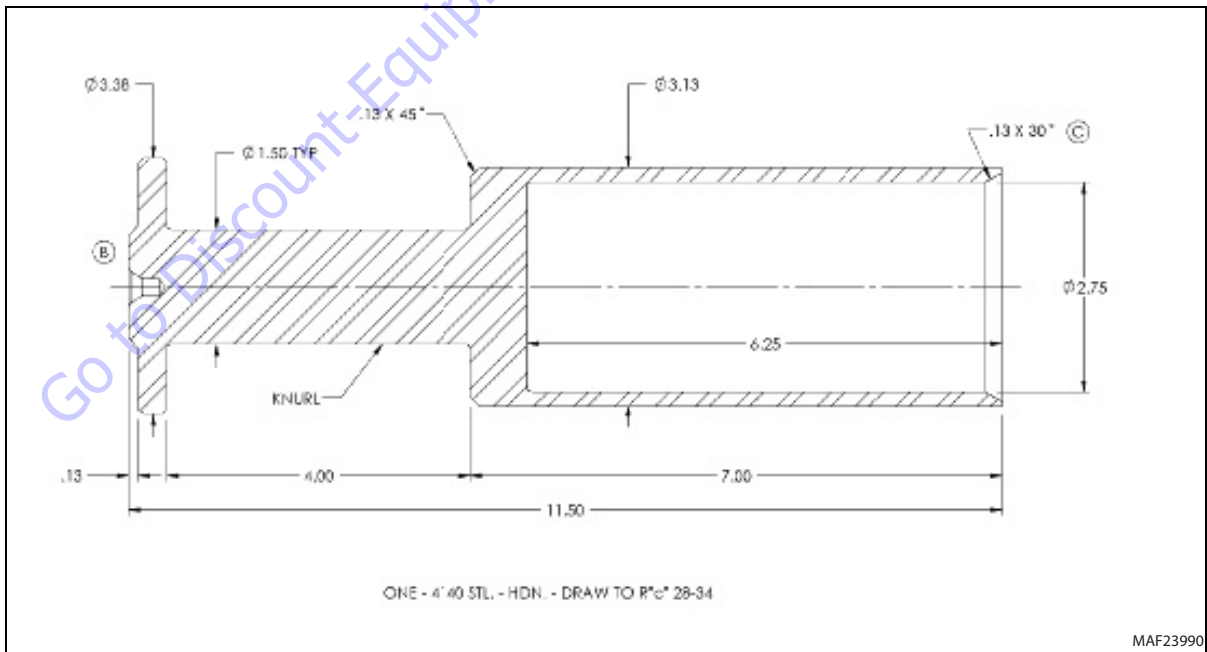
Bearing Cone Pressing Tool (T145741)
